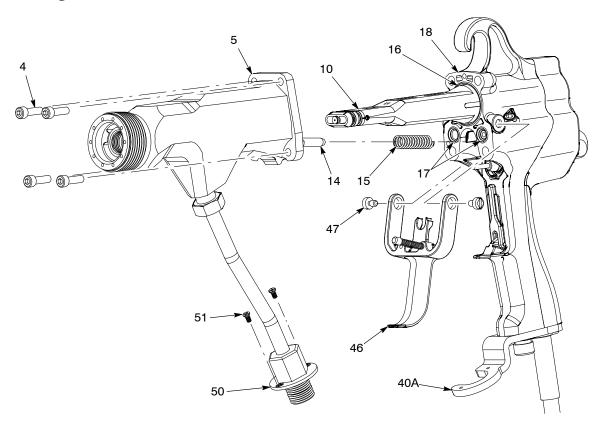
Packing Cartridge Replacement - Removing the Extension
